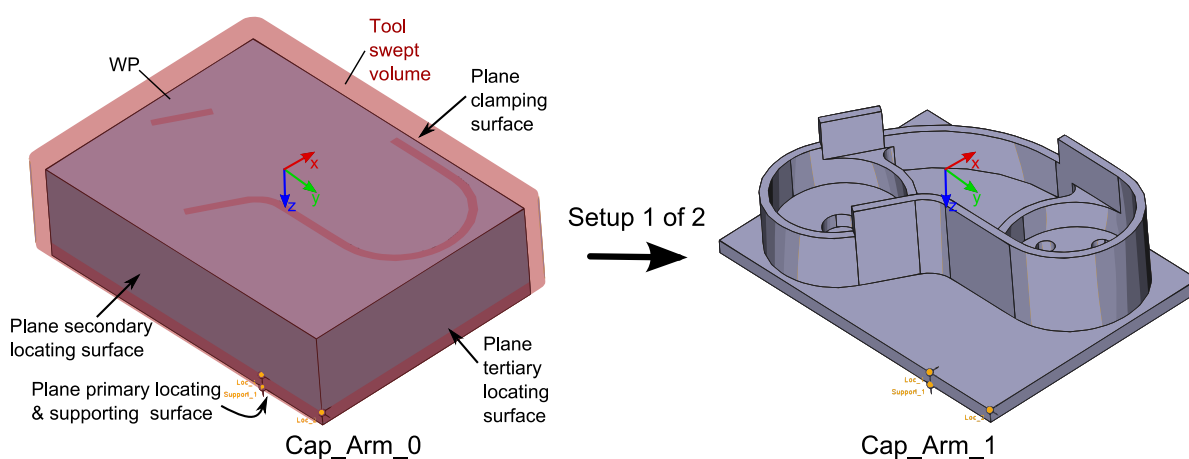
Setup 1 of 2 of workpiece Cap_Arm with all plane contact surfaces and secondary locating surface in positive y-direction
